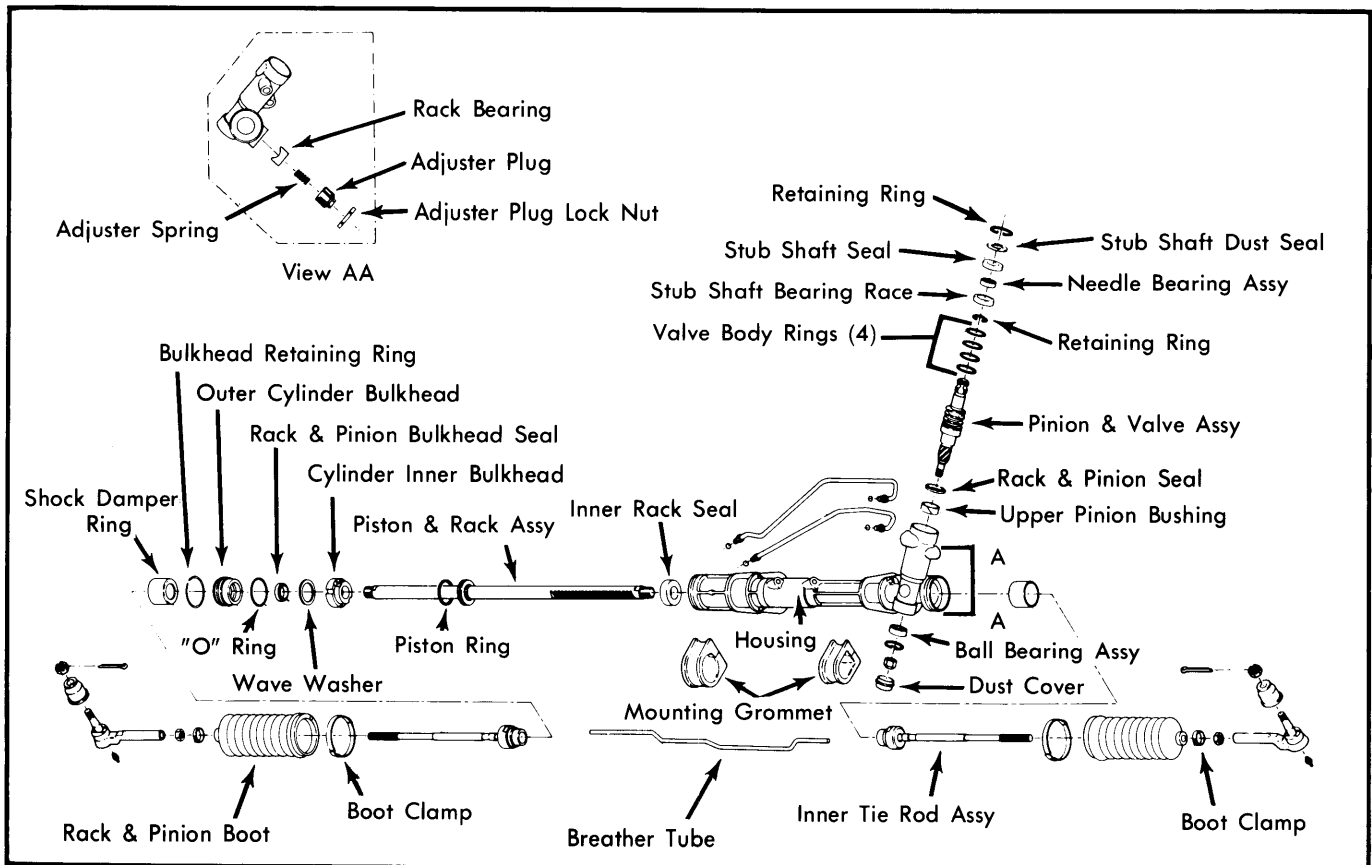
Power Rack & Pinion Steering Assembly (Horizon, Omni & Rampage Shown, Others Similar)
